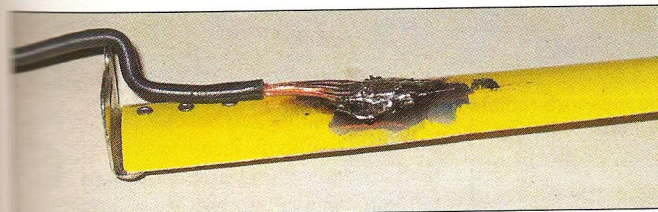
Stranded hookup wire, #14 AWG, soldered to bare metal area.
